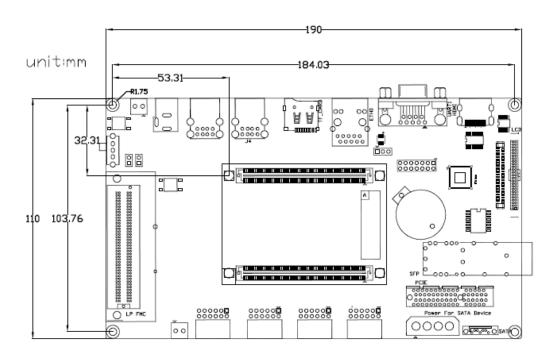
Dimensions of MYD-C7Z010/20 Development Board
